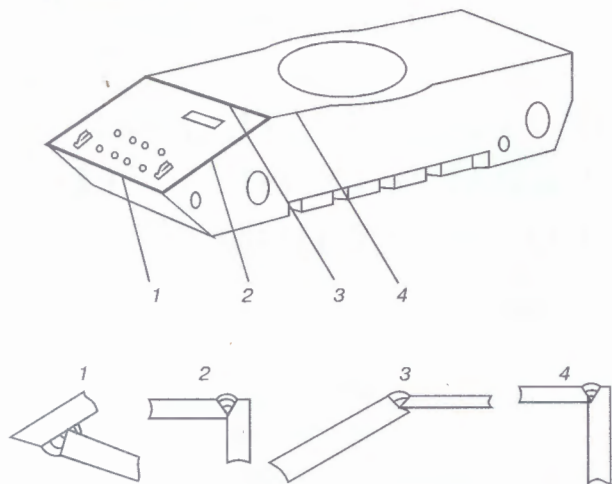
Scheme of welded joints of armoured hull of tank T-54: 1 — upper and lower sheet of sub-assembly «nose»; 2 — upper sheet of sub-assembly «nose» with a sheet «board»; 3 — upper sheet «nose» with sheet «roof»; 4 — front sheet «roof» with sheet «board»
